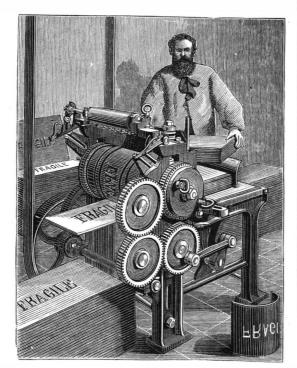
MACHINE FOR PRINTING ON WOOD.
